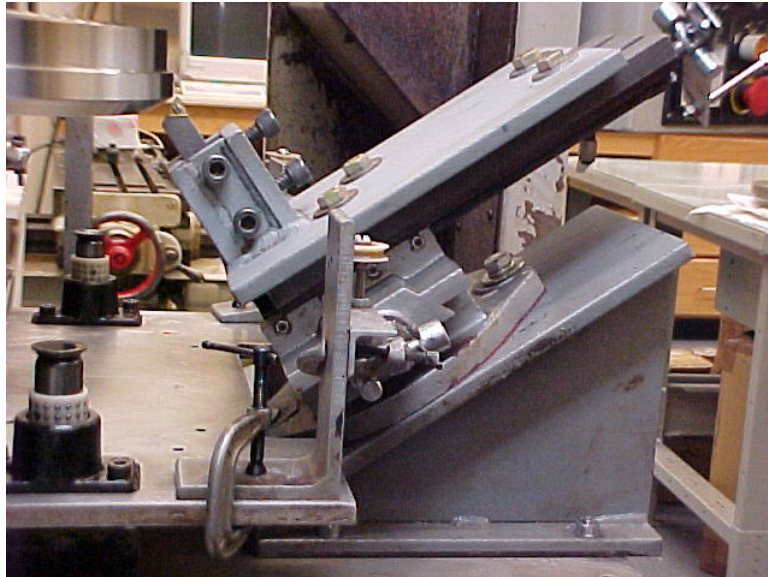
Photograph of the fixture used for machining the bevel of the spindle
